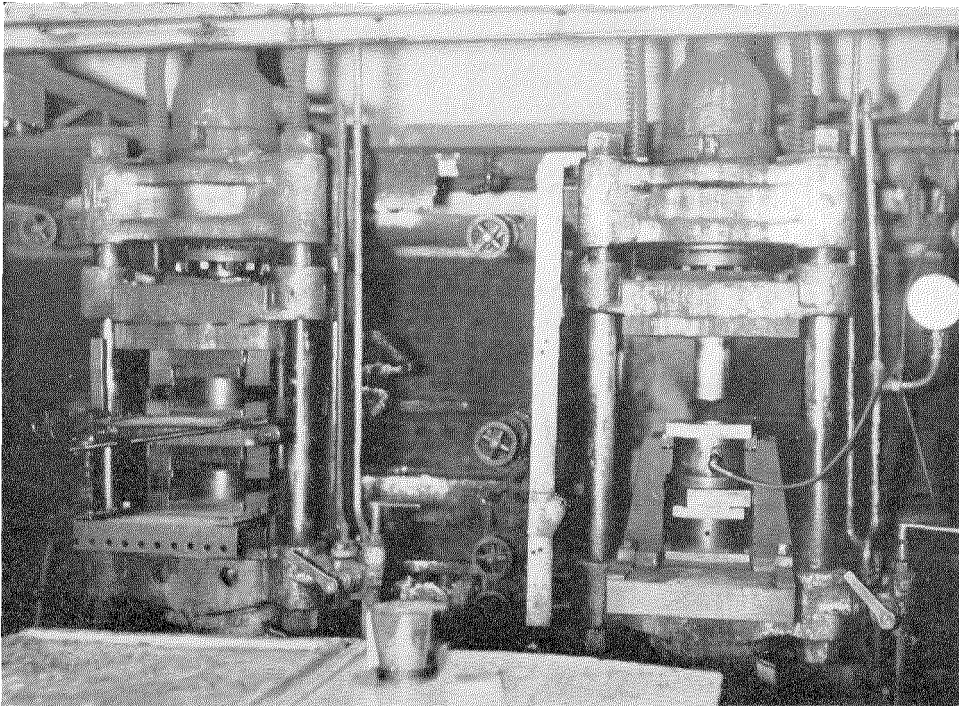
Moulding Equipment for Selector Terminal Block, Shown on Fig. 6.
